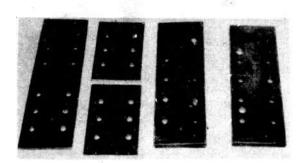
PLATES USED IN JOINT (SECONDARY UNIT)
